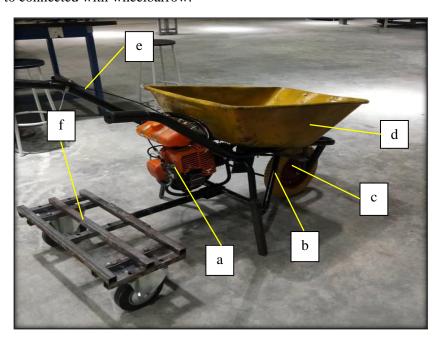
(a) 33cc lawn mower engine (b) Wheel (c) Sprockets (d) Bucket (e) Handle and (f) Platform of motorized wheelbarrow
